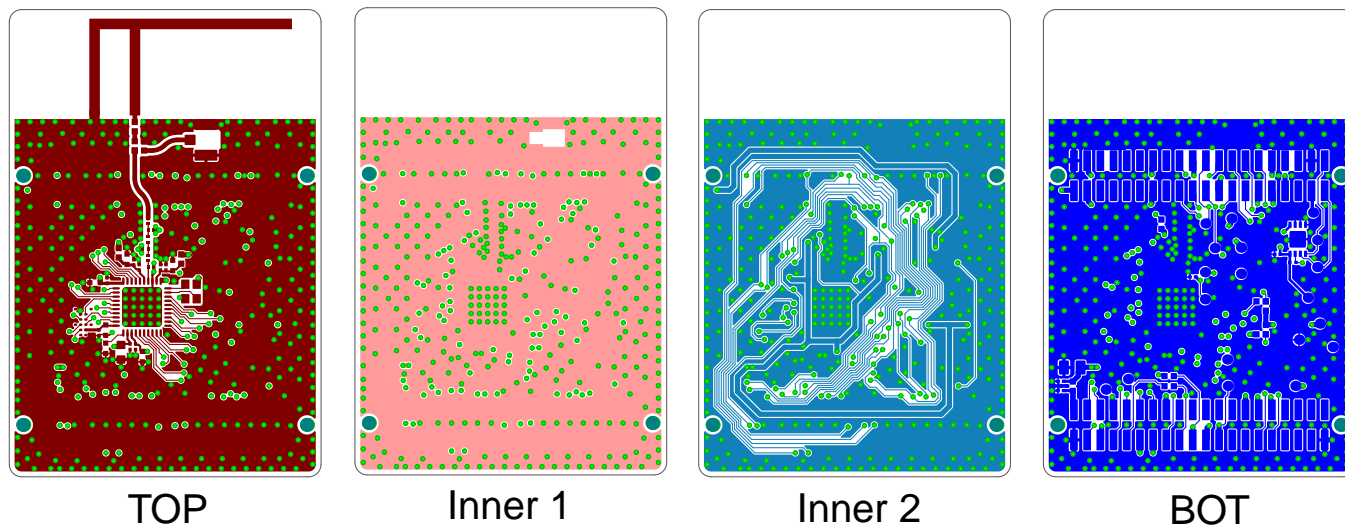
Layer Consistency on BRD4408A Radio Board
